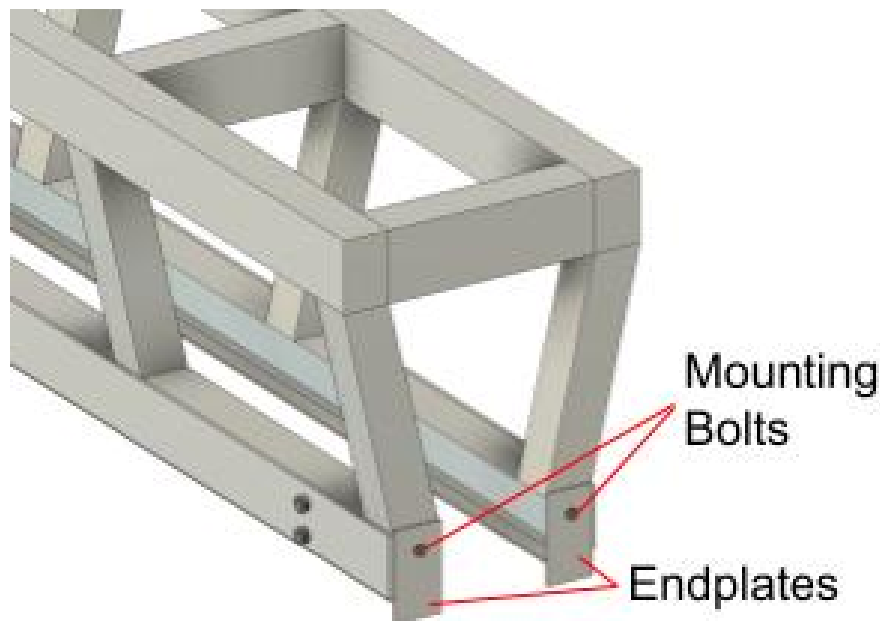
Mounted Endplates to Prevent Rocket Detachment
